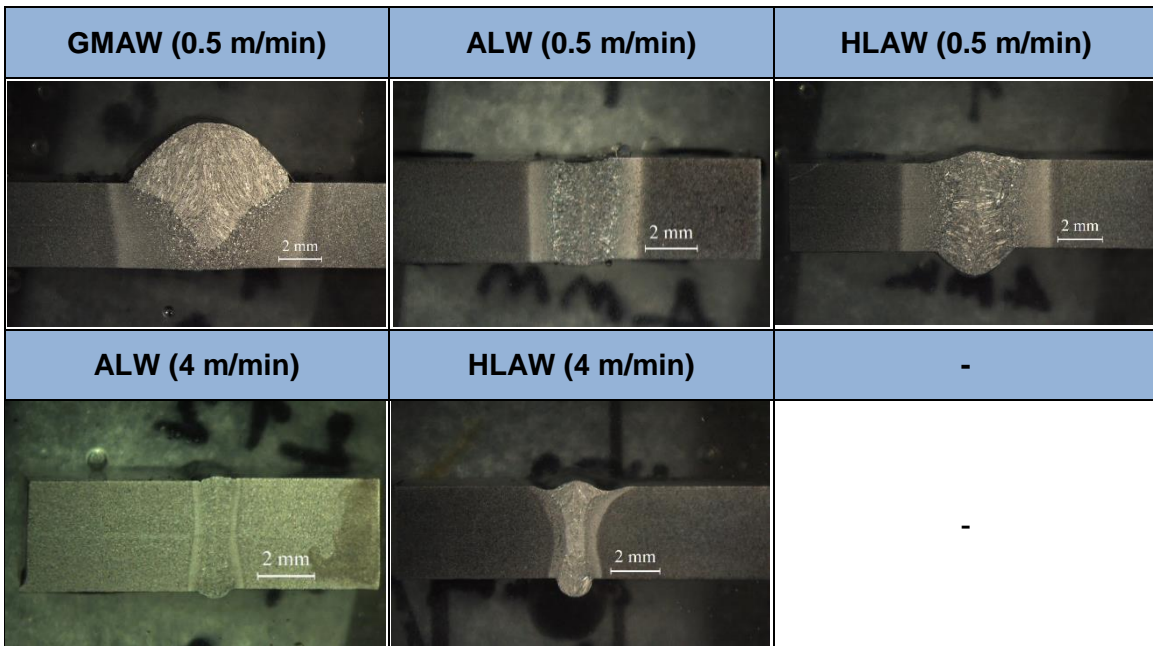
Macrographs of specimen welded by different welding processes at different travel speeds – 4 mm thickness
